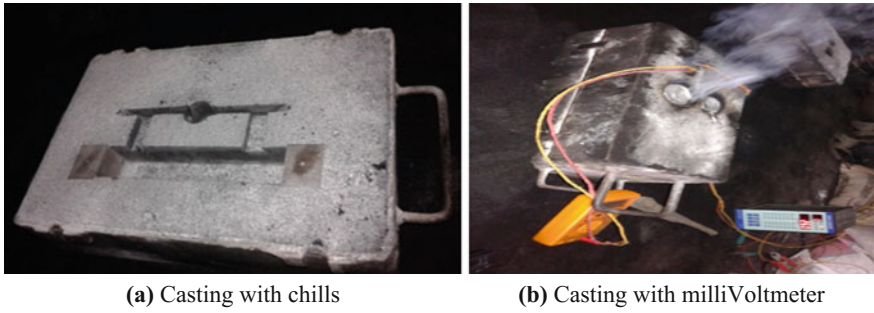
a Casting with chills. b Casting with millivoltmeter
